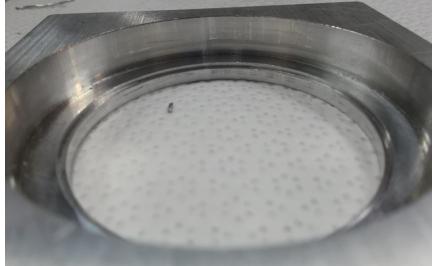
Aluminium block to press indium onto MC sealing surface (IVC block not shown).
